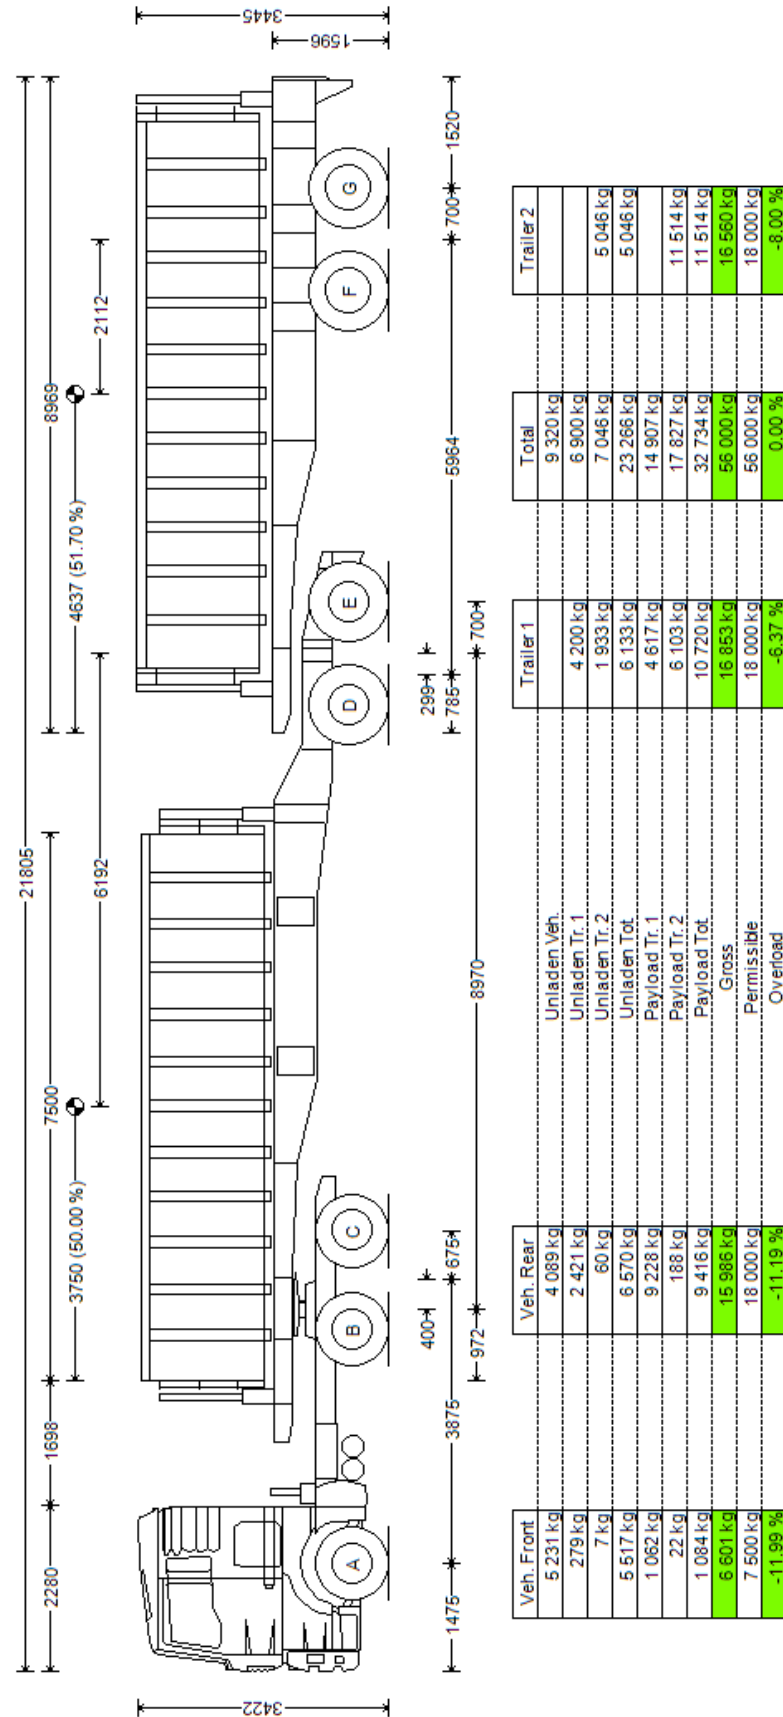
Layout dimensional drawing of the Tipper B-double configuration
